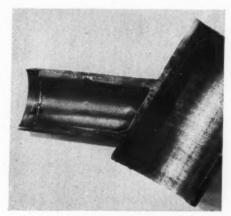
Section through bicycle weld, showing reenforcement in tube
